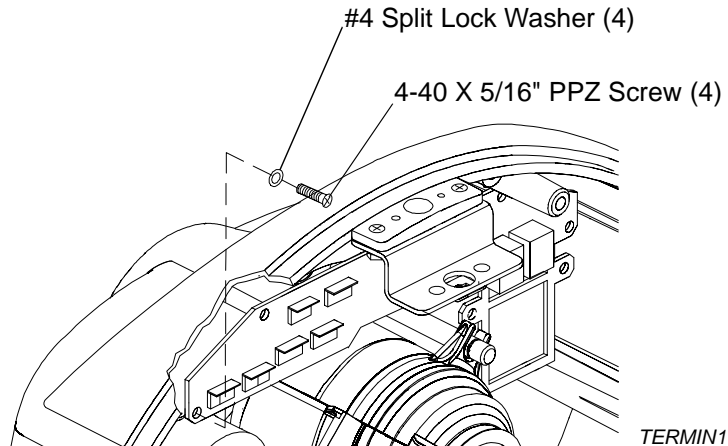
VL6 Luminaire Yoke Termination PCB Replacement
